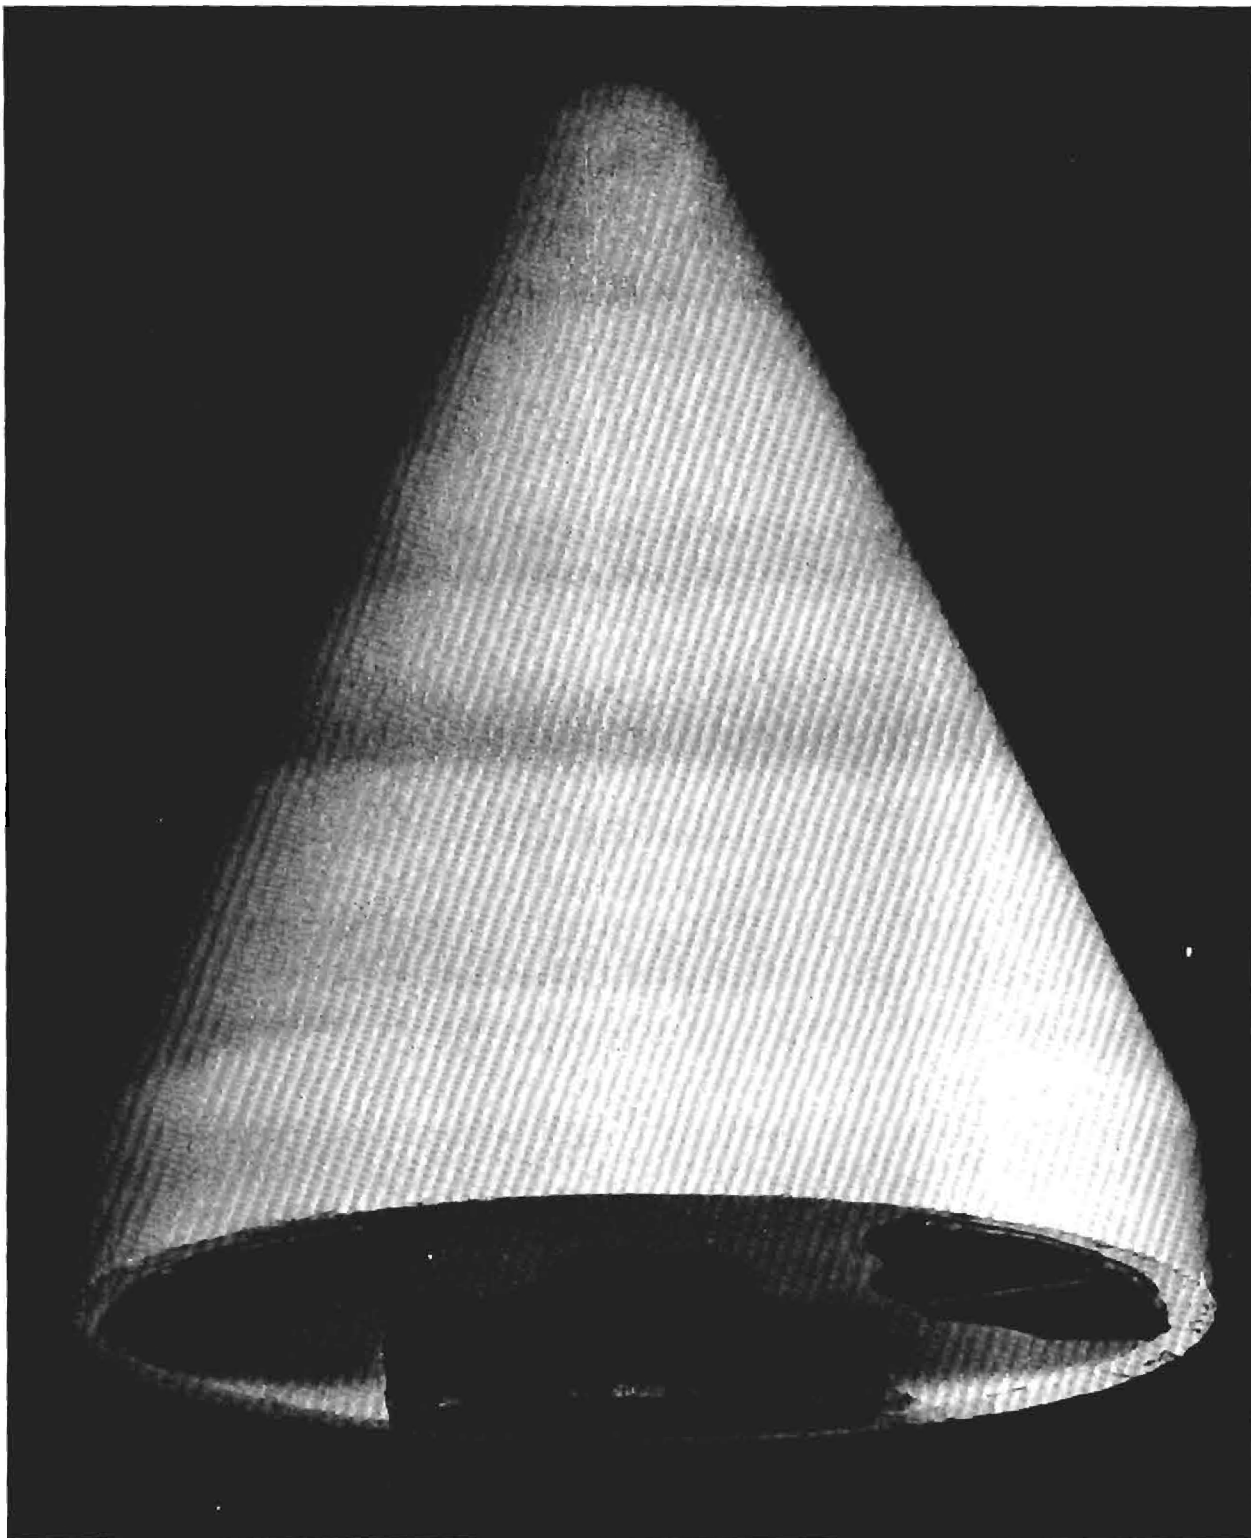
Fused Silica Nose Cone Showing Mounting Brackets Cemented in Place with Adhesive Resin.
